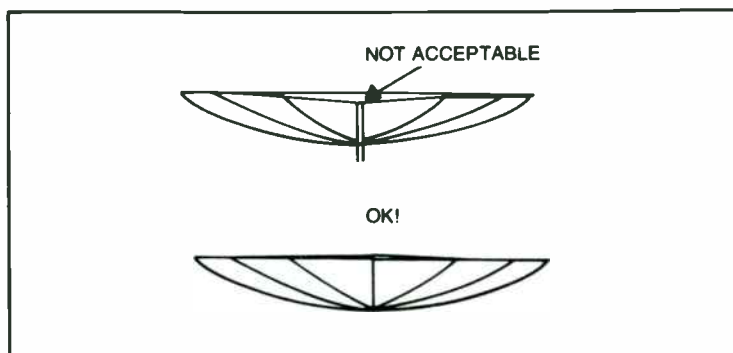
Method of checking the parabola of the dish for accuracy.
